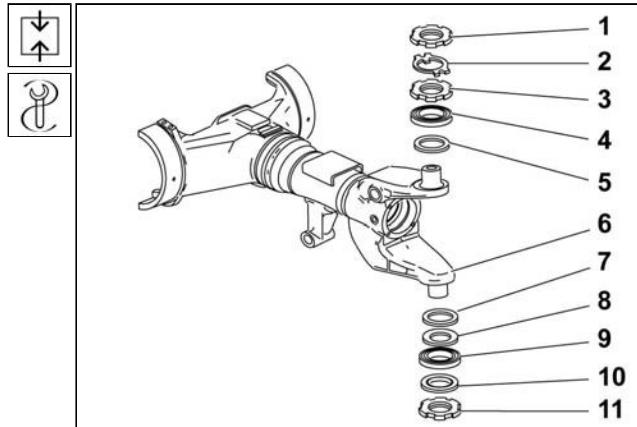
Bearings of axle shaft yoke swivel pin - installation
